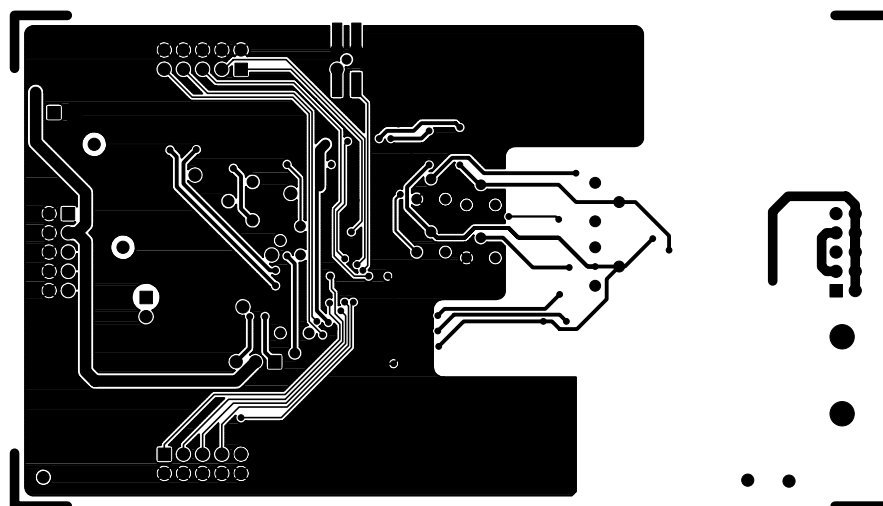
Si3210CARD-EVB with Discretes Solder Side
